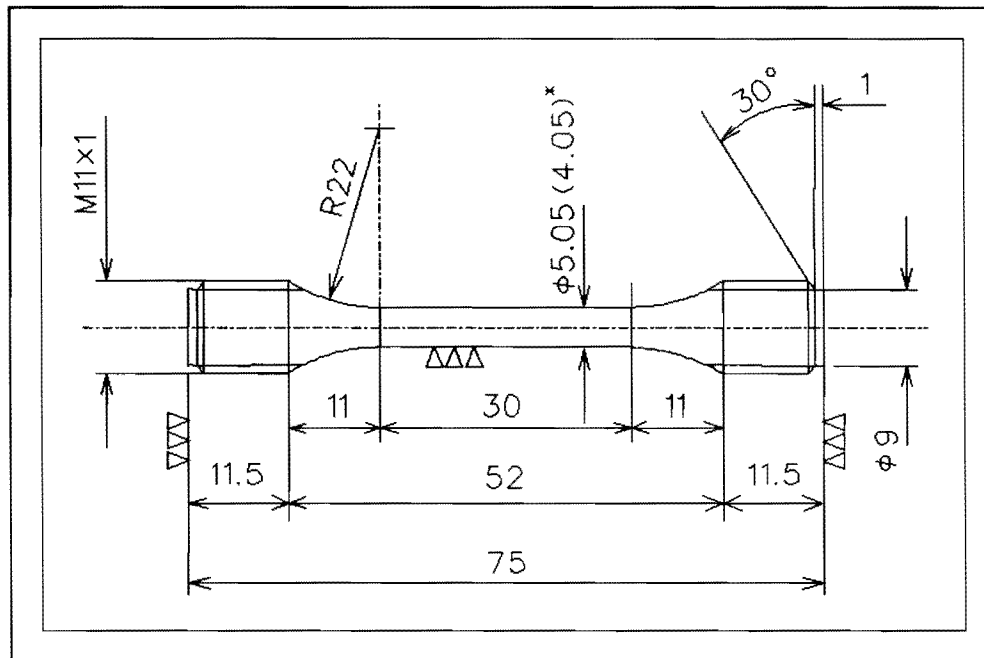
Dimensions of specimen and modified specimen for fatigue testing
